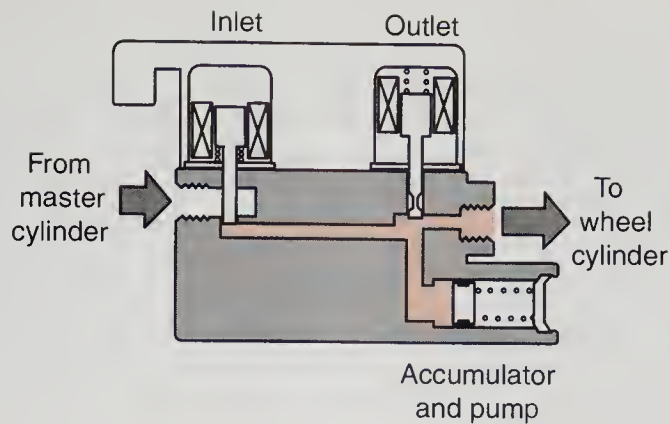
In the decay phase, the inlet valve still blocks master cylinder pressure while the open outlet valve allows some brake line fluid to escape to the accumulator.
